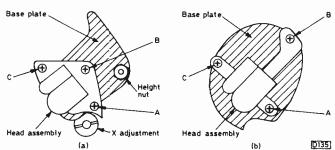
Typical audio/control head assembly layouts, (a) with height adjustment nut, e.g. Hitachi models, (b) without height adjustment nut, e.g. Ferguson 3V22.
